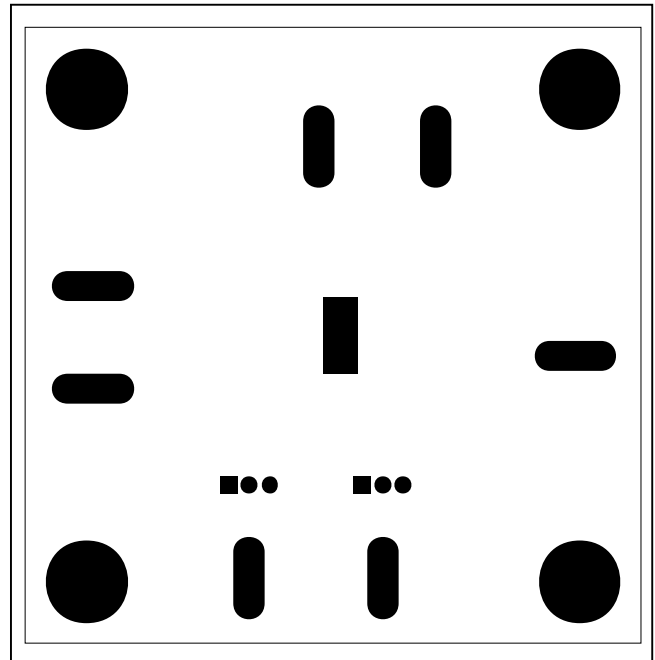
MAX17620 EV Kit Solder Mask—Solder Side
